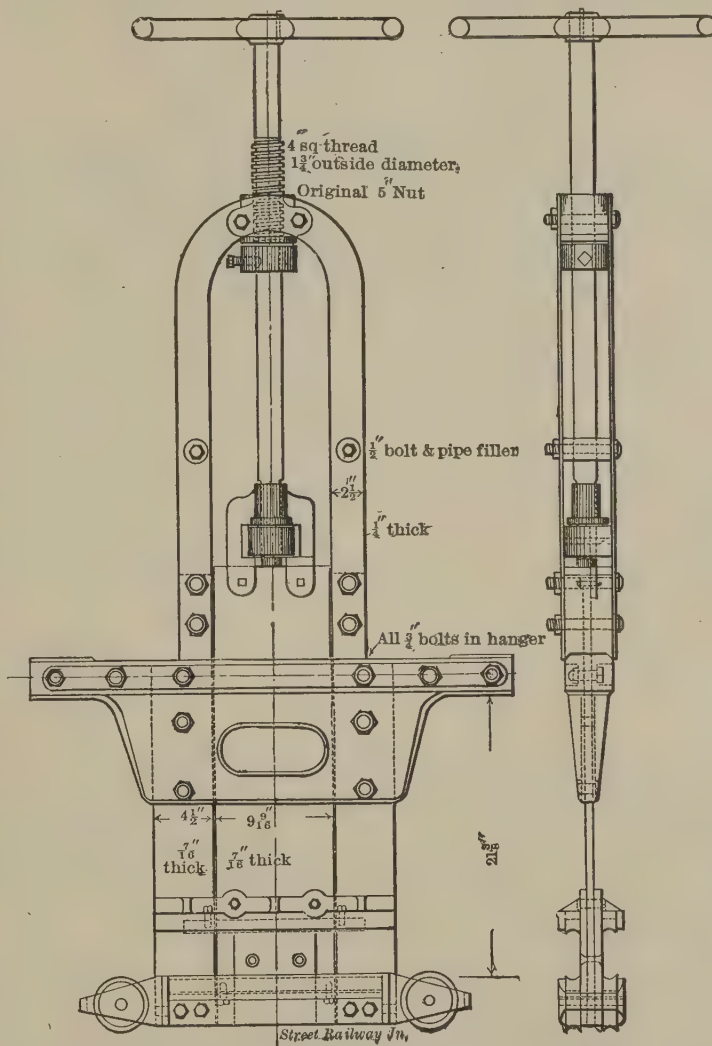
SCREW SPINDLE GRIP—PROVIDENCE, R. I., CABLE LINE.
